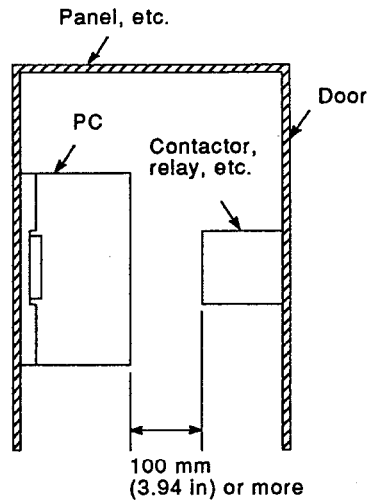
Minimum Front Clearance with Panel Door Shut
